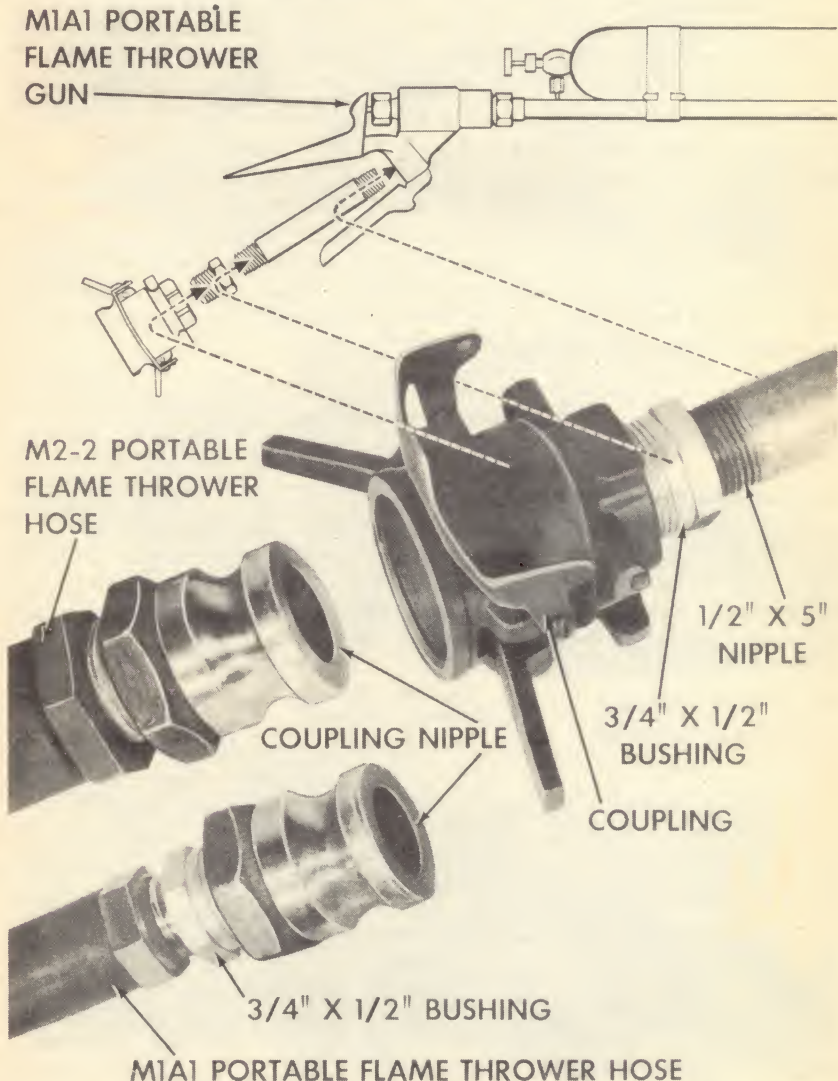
Gun of M1A1 portable flame thrower adapted for hose.
